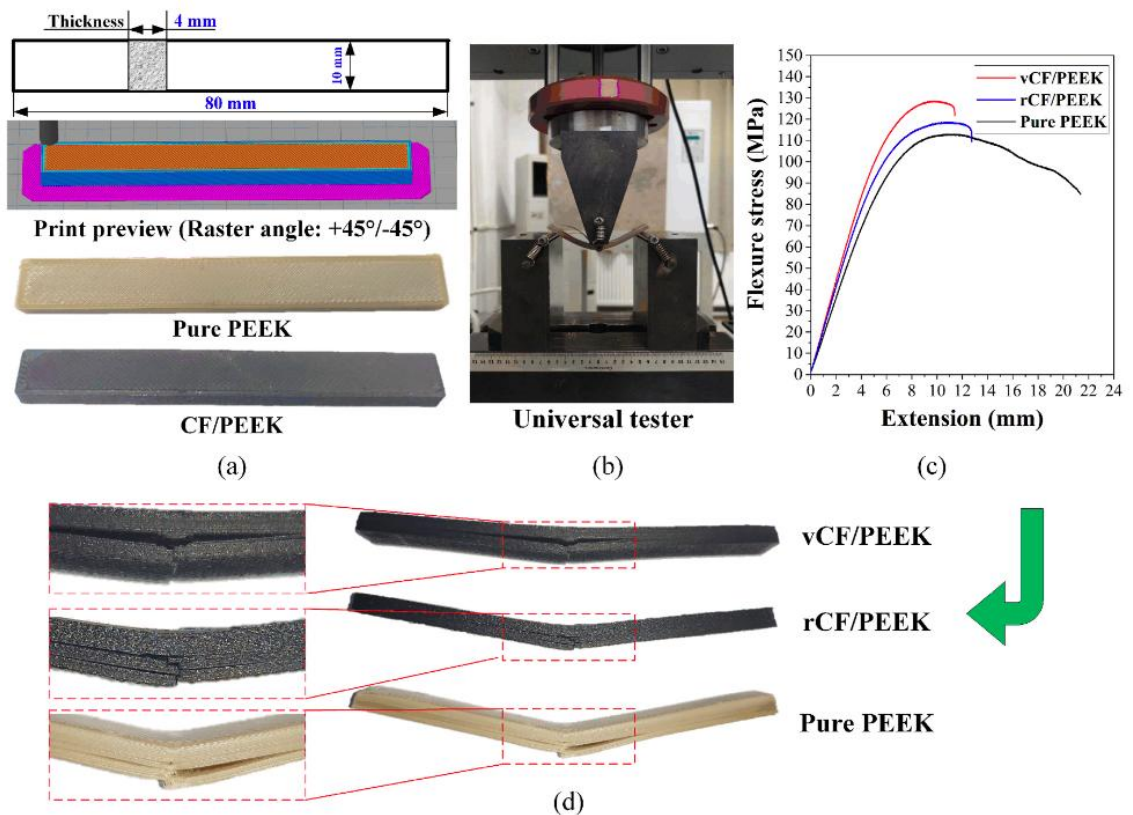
Flexural test of the 3D printed rCFRP specimens: (a) dimensions, 3D print preview, and printout of the specimen; (b) flexural test setup; (c) representative stress-strain curve; (d) post-tested specimens showing failure modes [12]
